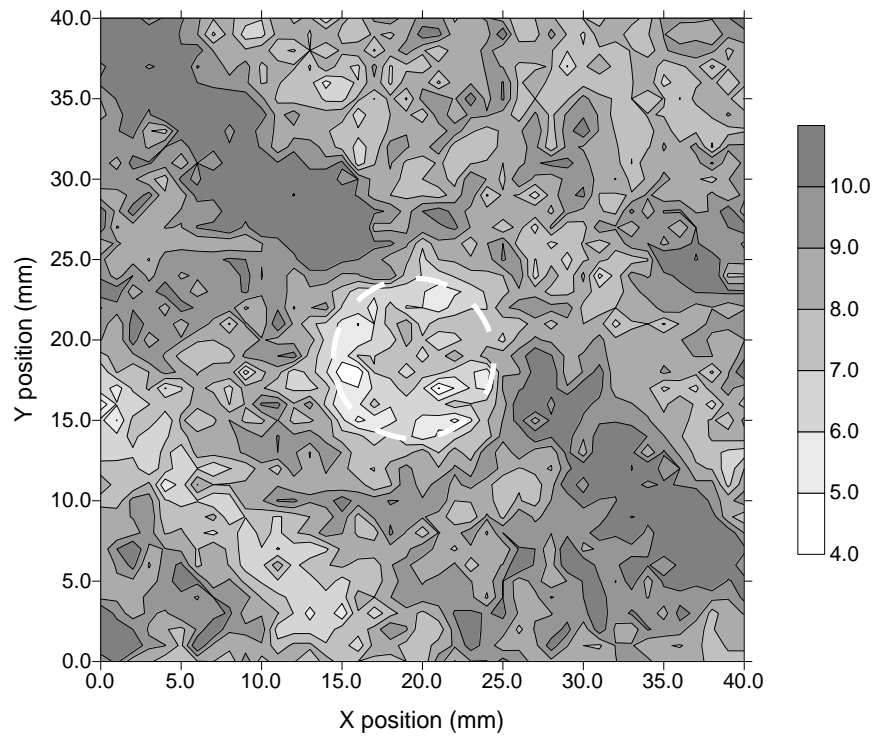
(a): Image of a defect 10mm diameter by 1mm deep machined into a 9.8mm thick pultruded composite plate. Grey scale is in mV.
